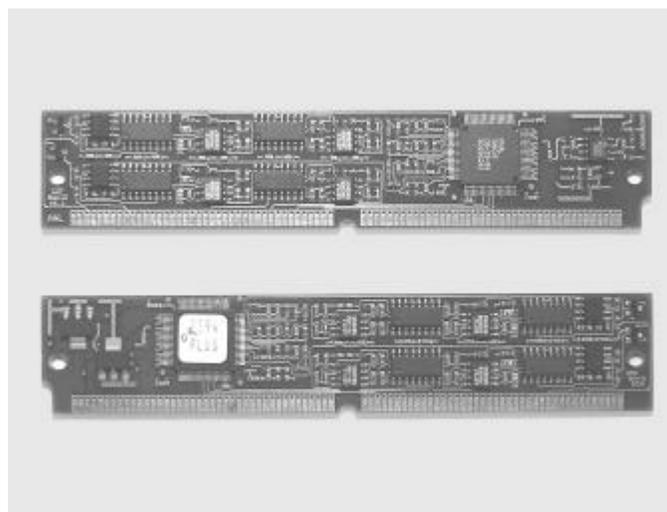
Front and Back Views of a SQUID with Mounted SMQIEs
